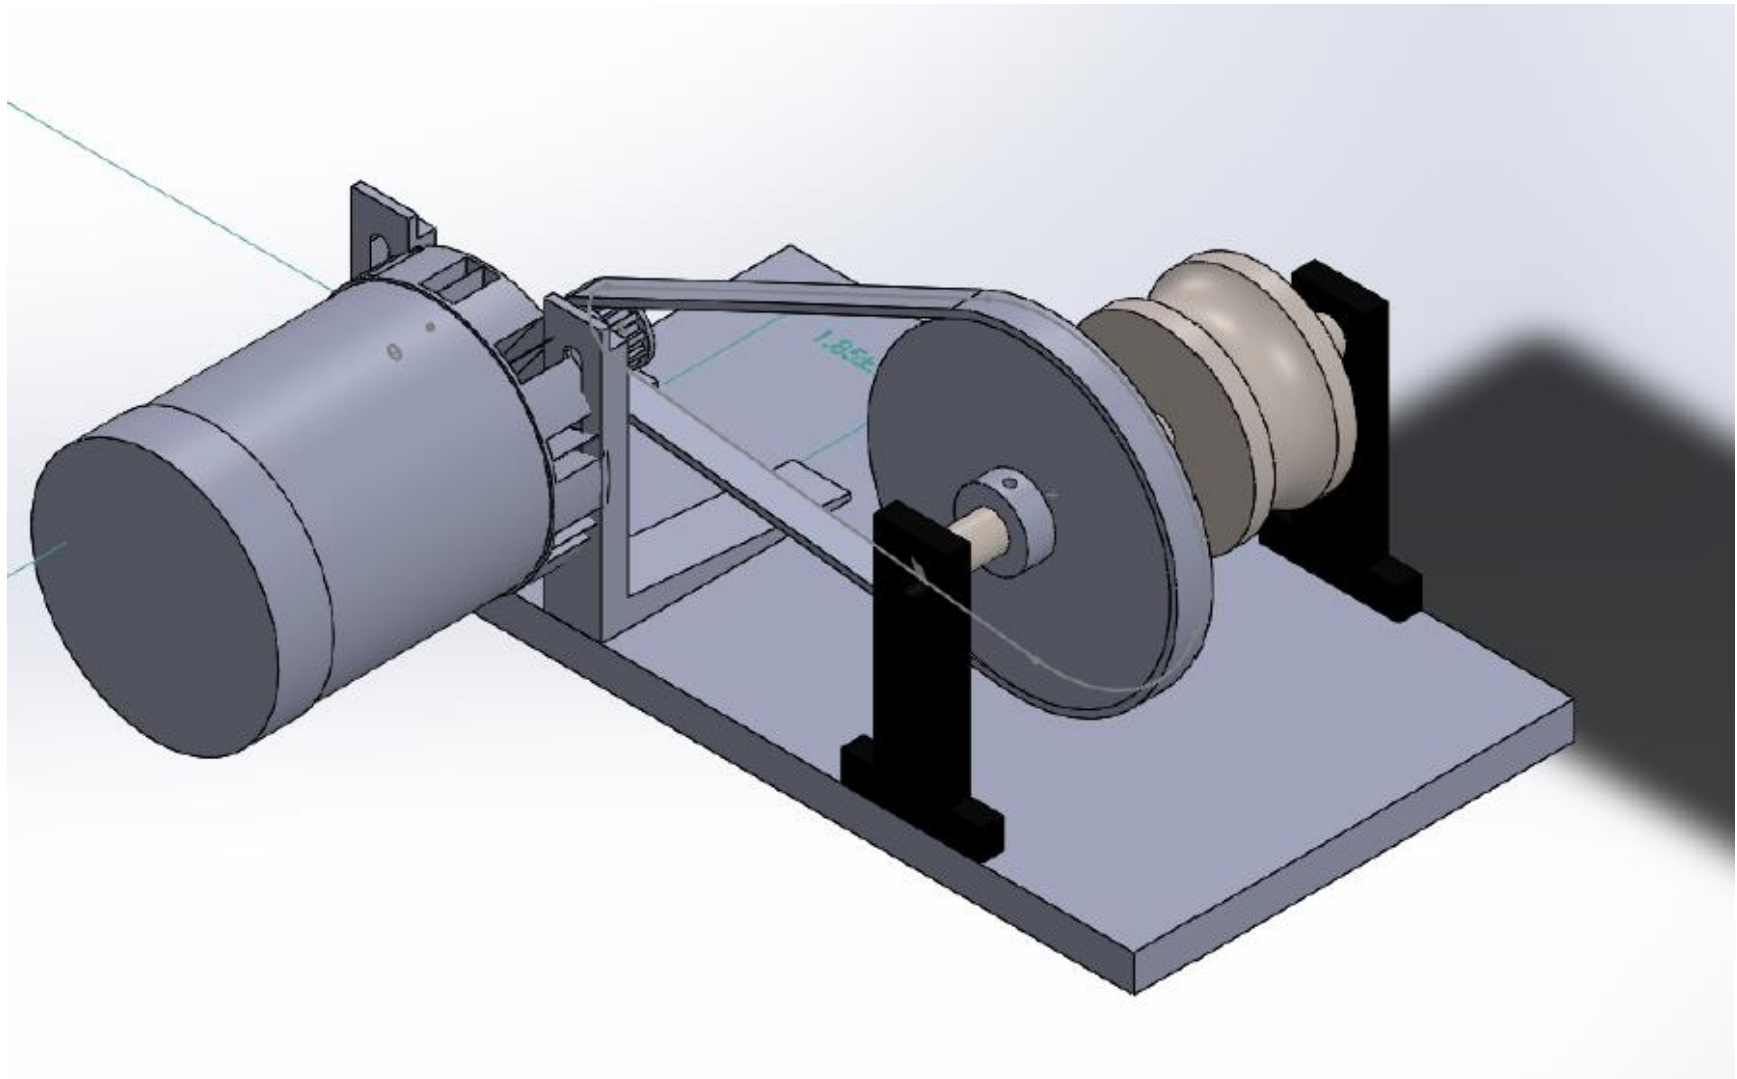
3D Model of the Lid Driven Cavity Flow Driver Mechanism
